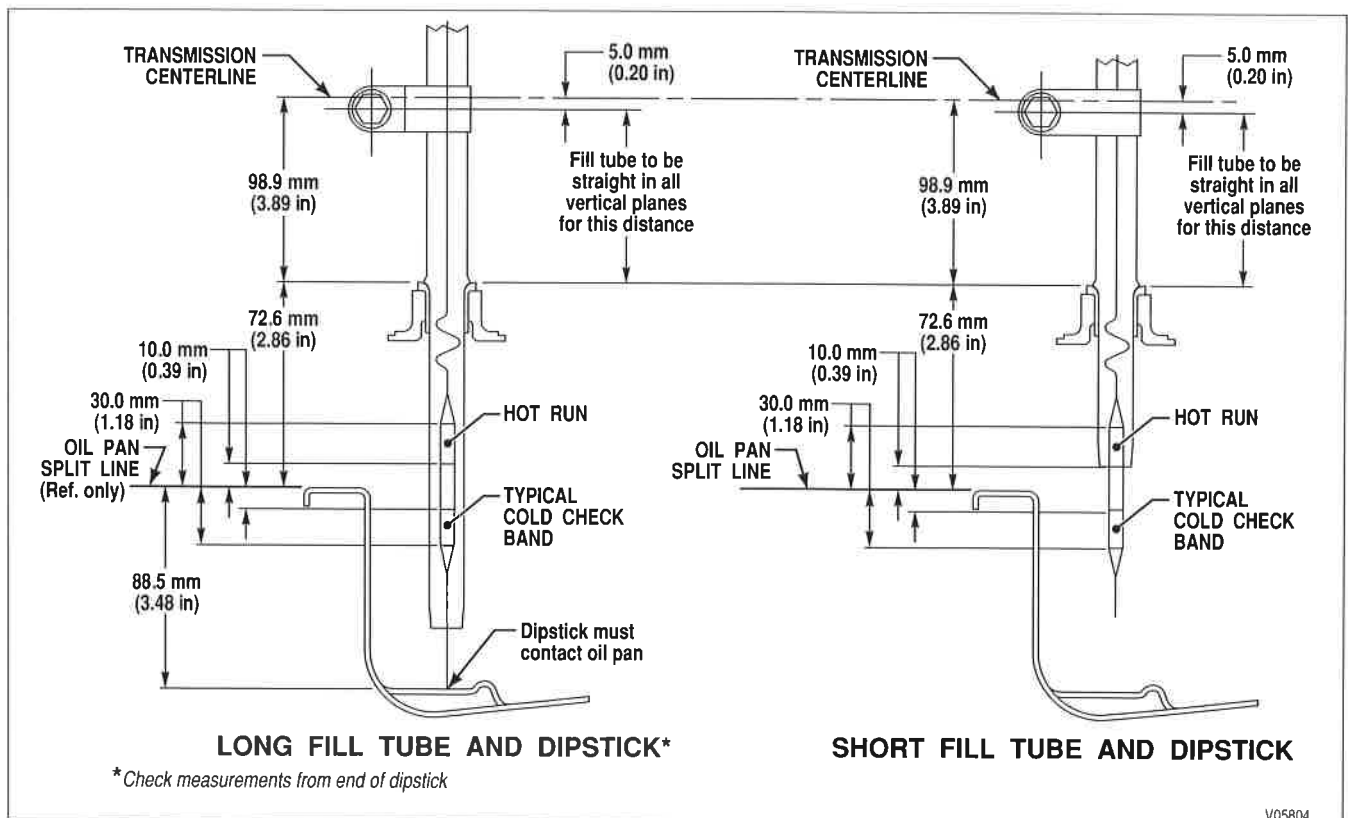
Fill Tube And Dipstick Requirements (Shallow Oil Pan)
